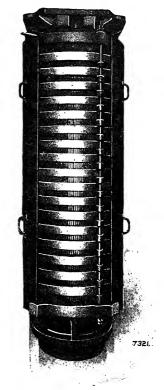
Construction of Cage Press showing sheet-steel oil splashing Guards.
